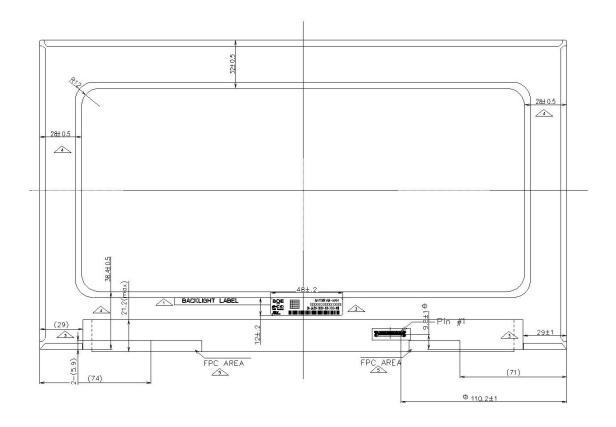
TFT-LCD Module Outline Dimensions (Rear view)
